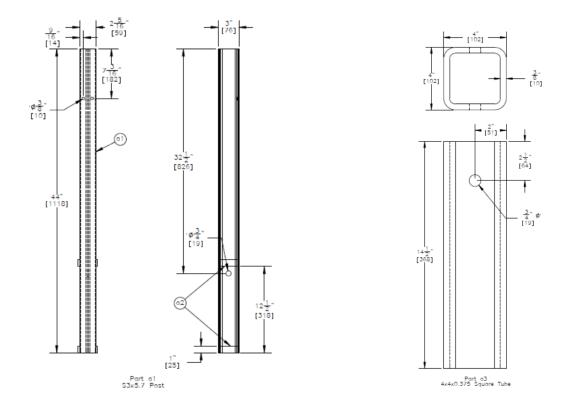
Post Assembly and Socket Tube from the MGS Bridge Rail [3]
